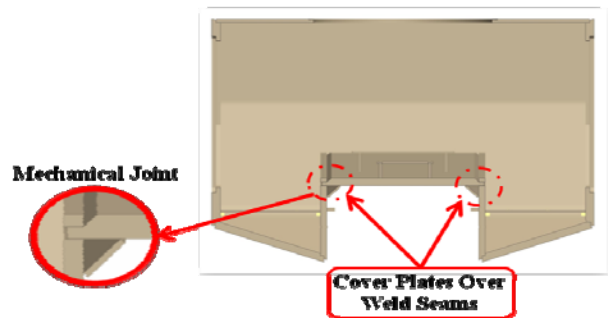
Tunnel Top Joint Design (mechanical locking joints and cover plates).
